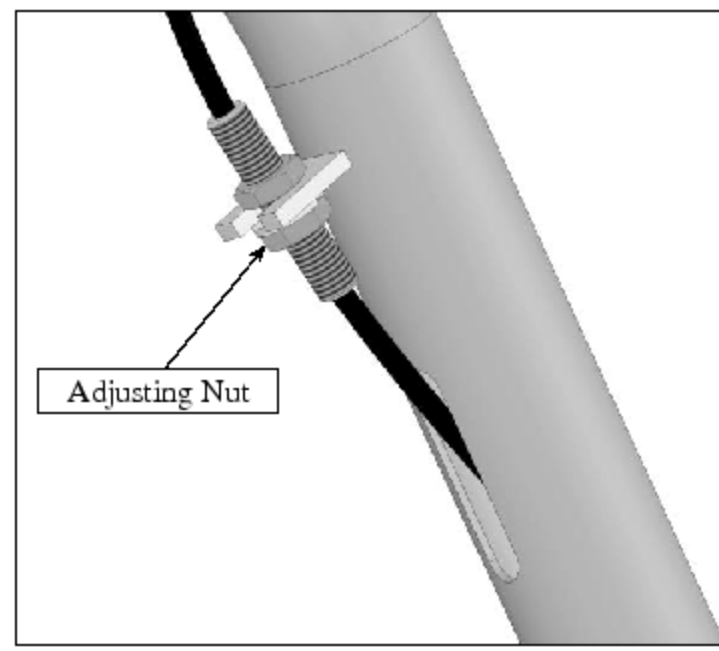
Once you have the handle working properly, tighten the bottom Adjusting Nut.
